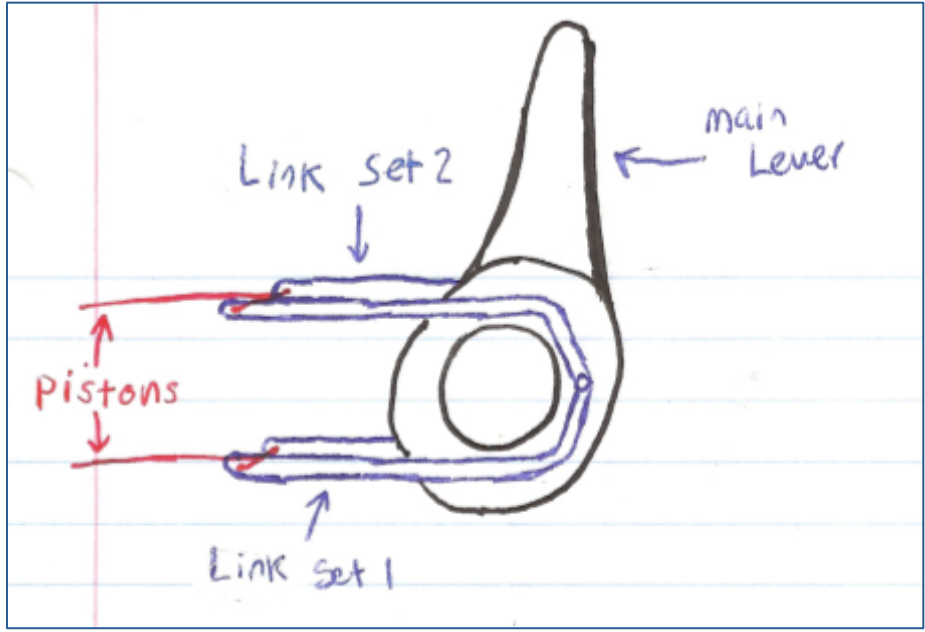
Side view of one of the levers of the double lever hydraulic system. The main lever would cause motion of the two flexible link sets. A stiff joint would be connected at the end of the link sets (shown in red) and the connected to a piston.
